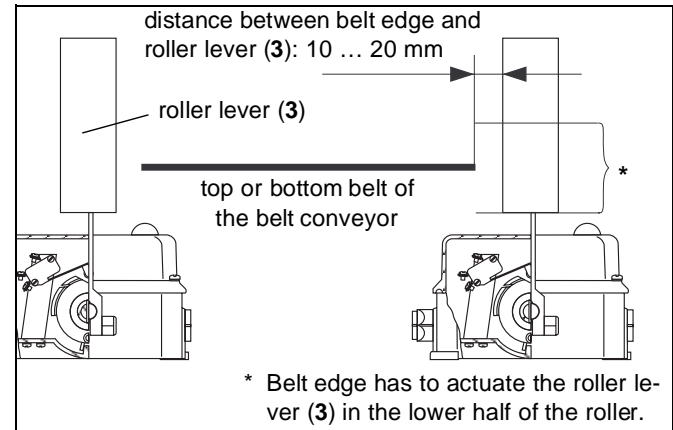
Mounting belt misalignment switches on the belt conveyor in pairs
